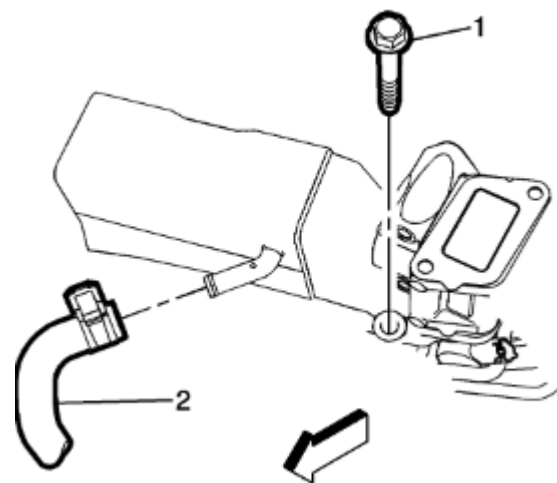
EGR manifold cooling return hose and mounting bolt installation
